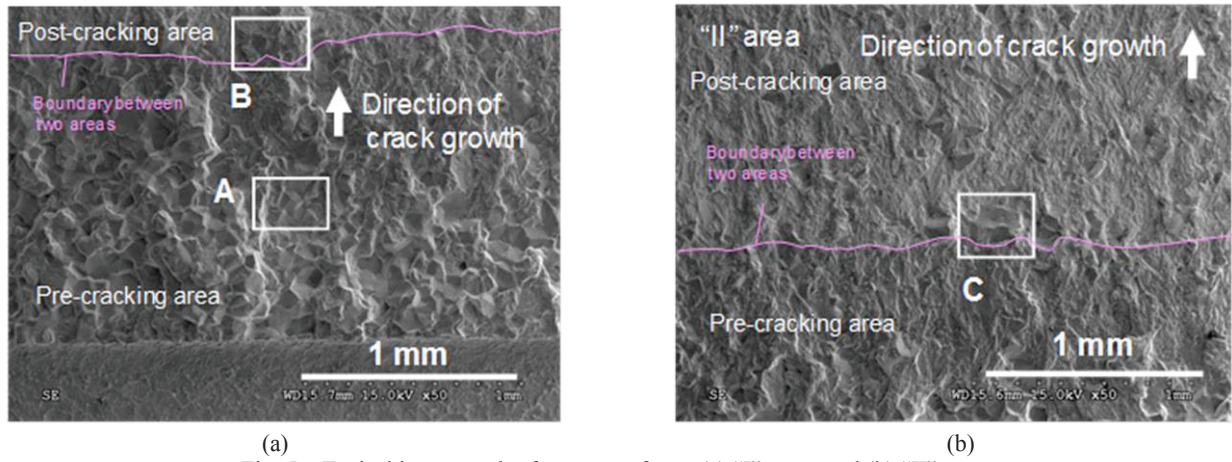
Typical intergranular fracture surfaces, (a) "I" zone, and (b) "II" zone.
